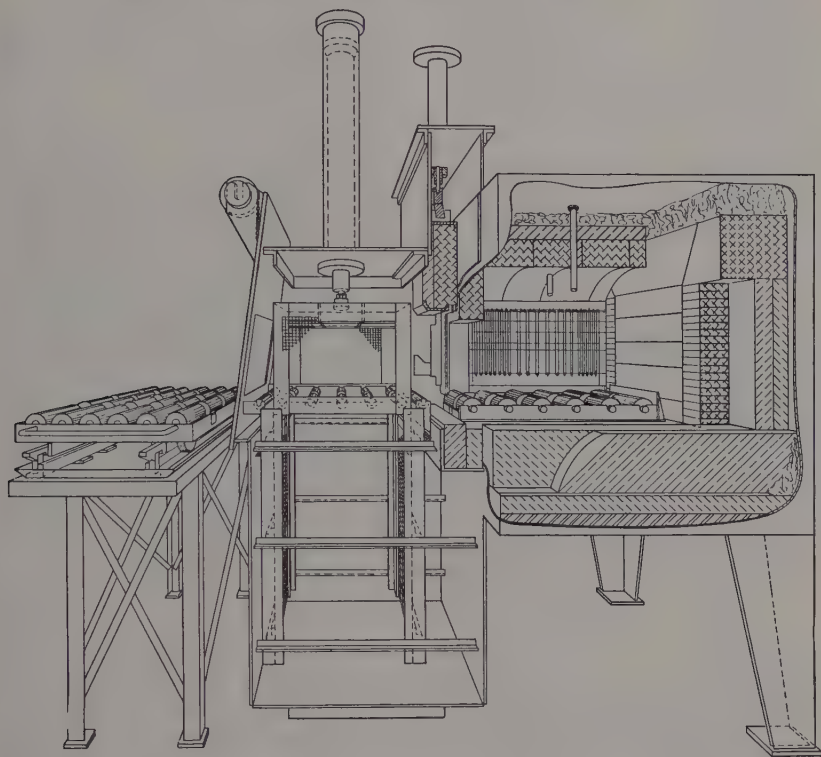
"General purpose" batch-type furnace filled with protective atmosphere.
